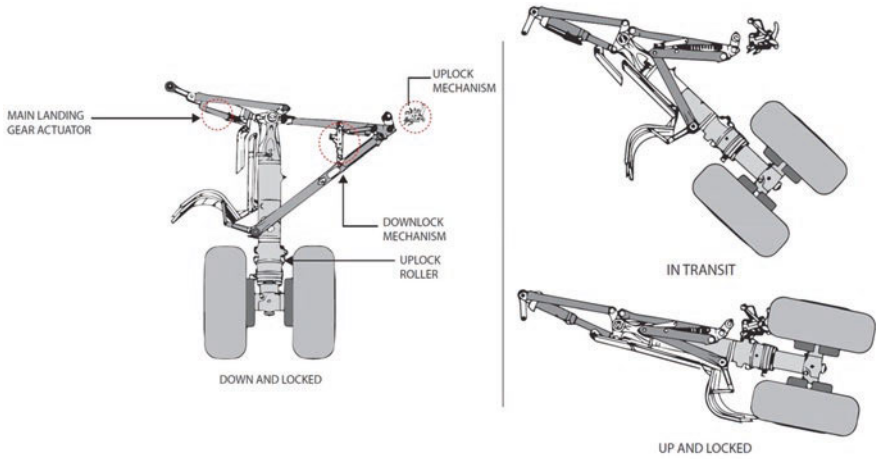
The opening and closing conditions of the Boeing 737 aircraft main landing gear
